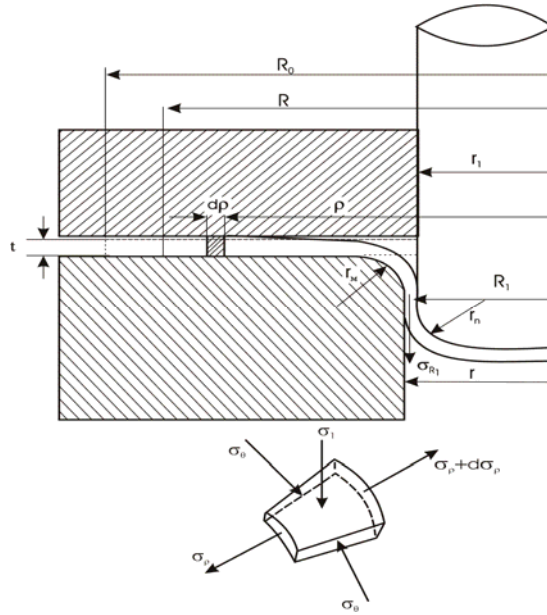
Scheme of the Cylindrical Cup Deep Drawing Process
